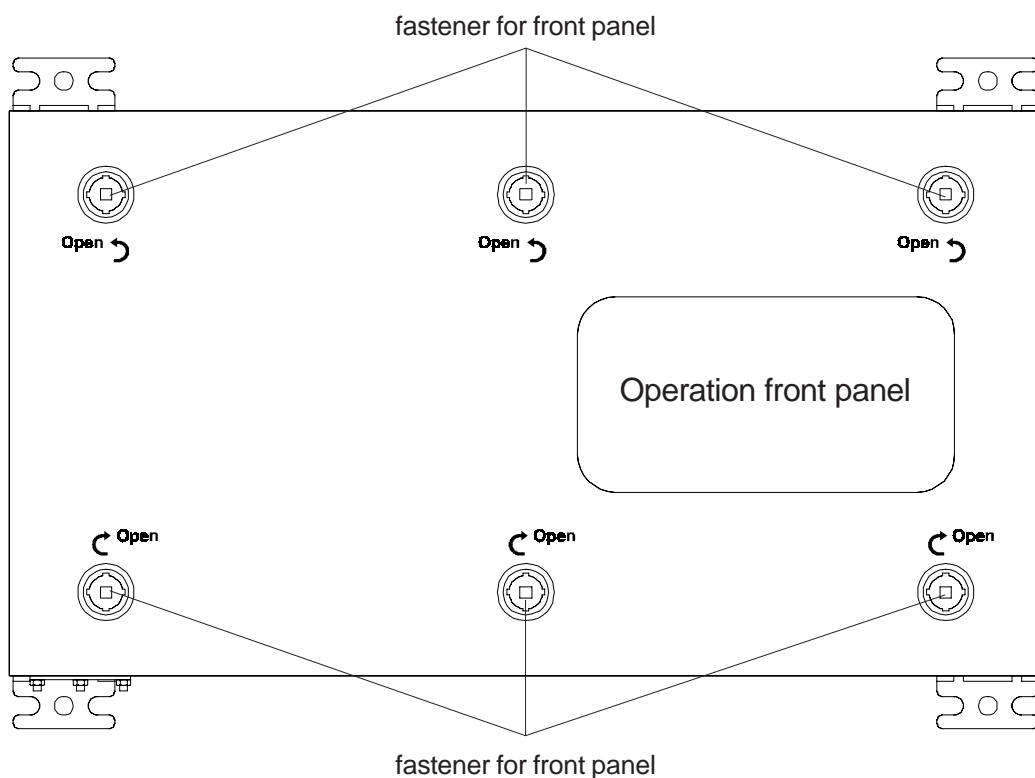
BINOS® 100 F (Field housing) (fastener for front panel)
